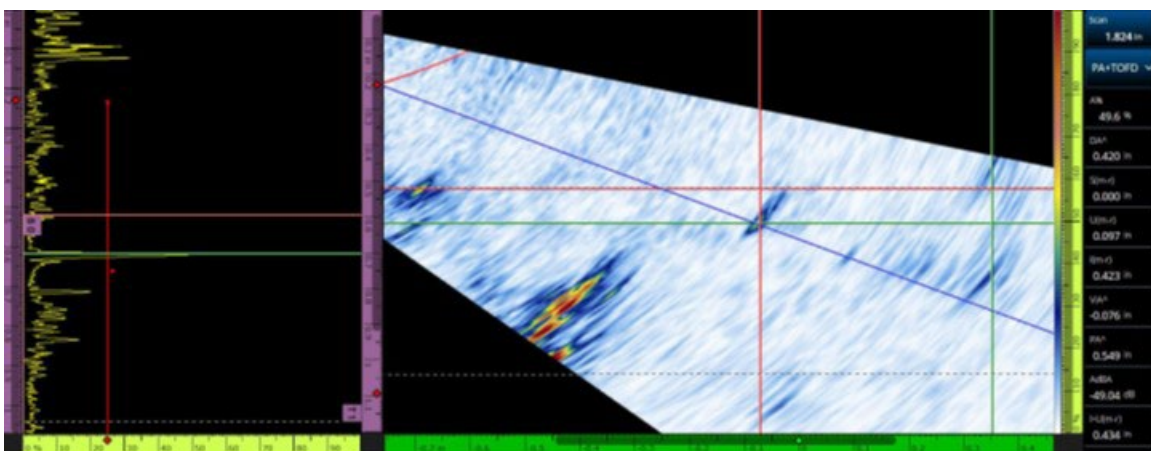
PAUT indication of defect at Location C in fillet weld test panel MGL-10 from Repad-raster scan
